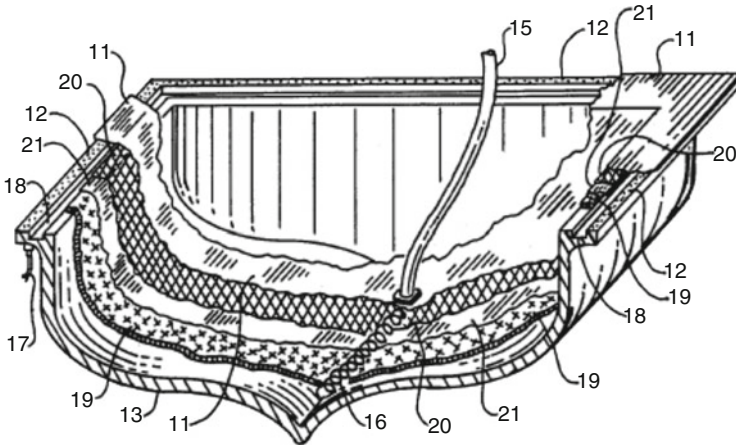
Typical SCRIMP assembly for production of a fiberglass boat hull [33]
